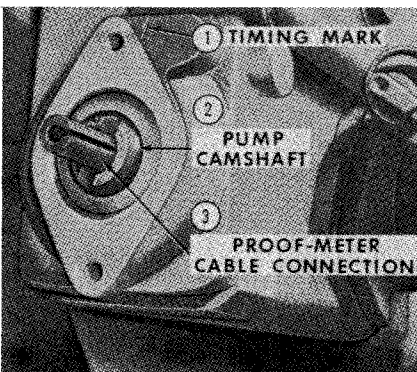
View of fuel injection pump with Proof-Meter drive cover removed. "V" notch with two punch marks on rear end of pump camshaft should align with timing mark on housing when No. 1 piston is at 23° BTDC on compression stroke.
